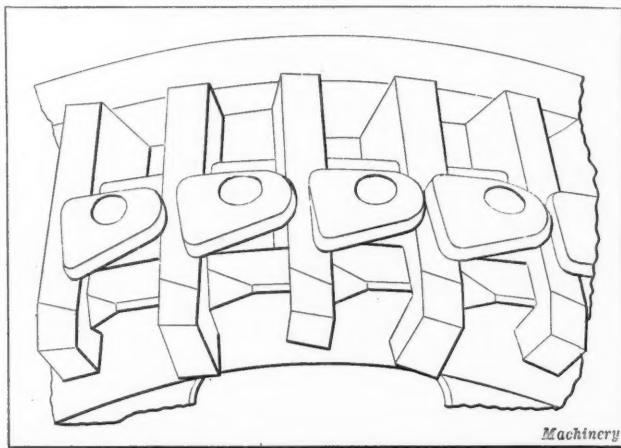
Section of Inserted-tooth Stellite Milling Cutter for Cast Iron or Semi-steel
